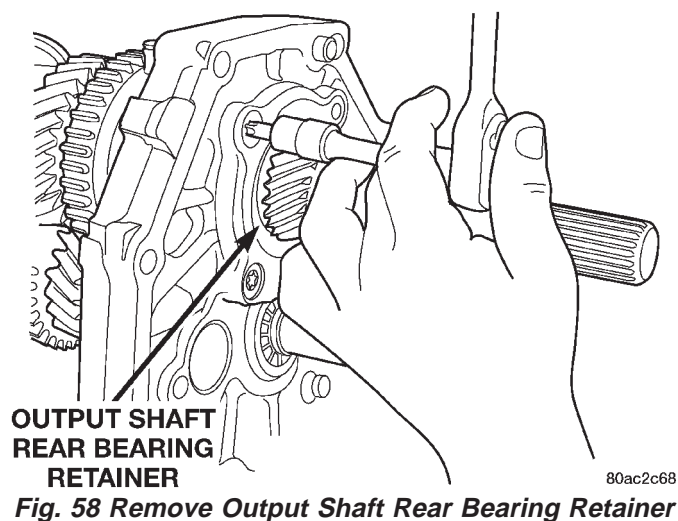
Remove Output Shaft Rear Bearing Retainer
